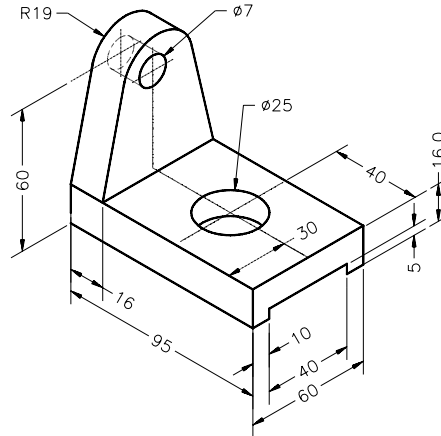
Drawing for Exercise 13: draw the front view in full section
